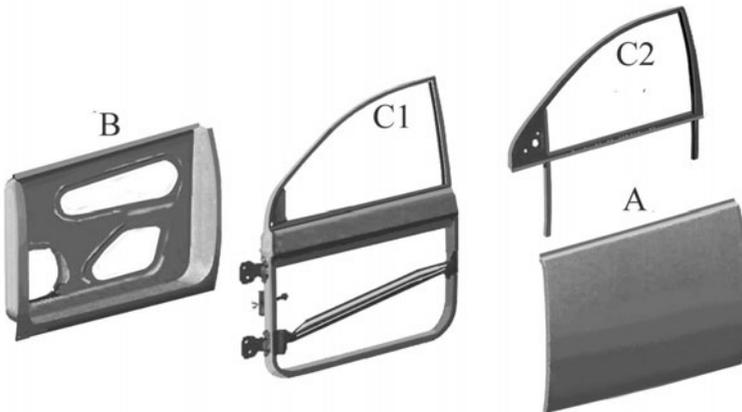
Typical components of a sash door: A) outer panel; B) inner panel; C1) frame assembly - modular door; C2) window frame (sash).
